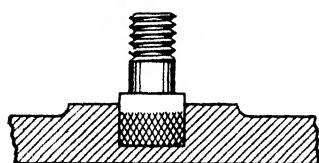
Threaded inserts preferably should have a shoulder projecting slightly above the face of the casting or a boss thereof. The shoulder tends to prevent molten metal from finding its way along the stud and into the thread and also (if the hole in the mating part is not larger than the shoulder) takes thrust applied by tightening a nut on the stud that otherwise may be pulled out of the casting if the nut is tightened unduly.
